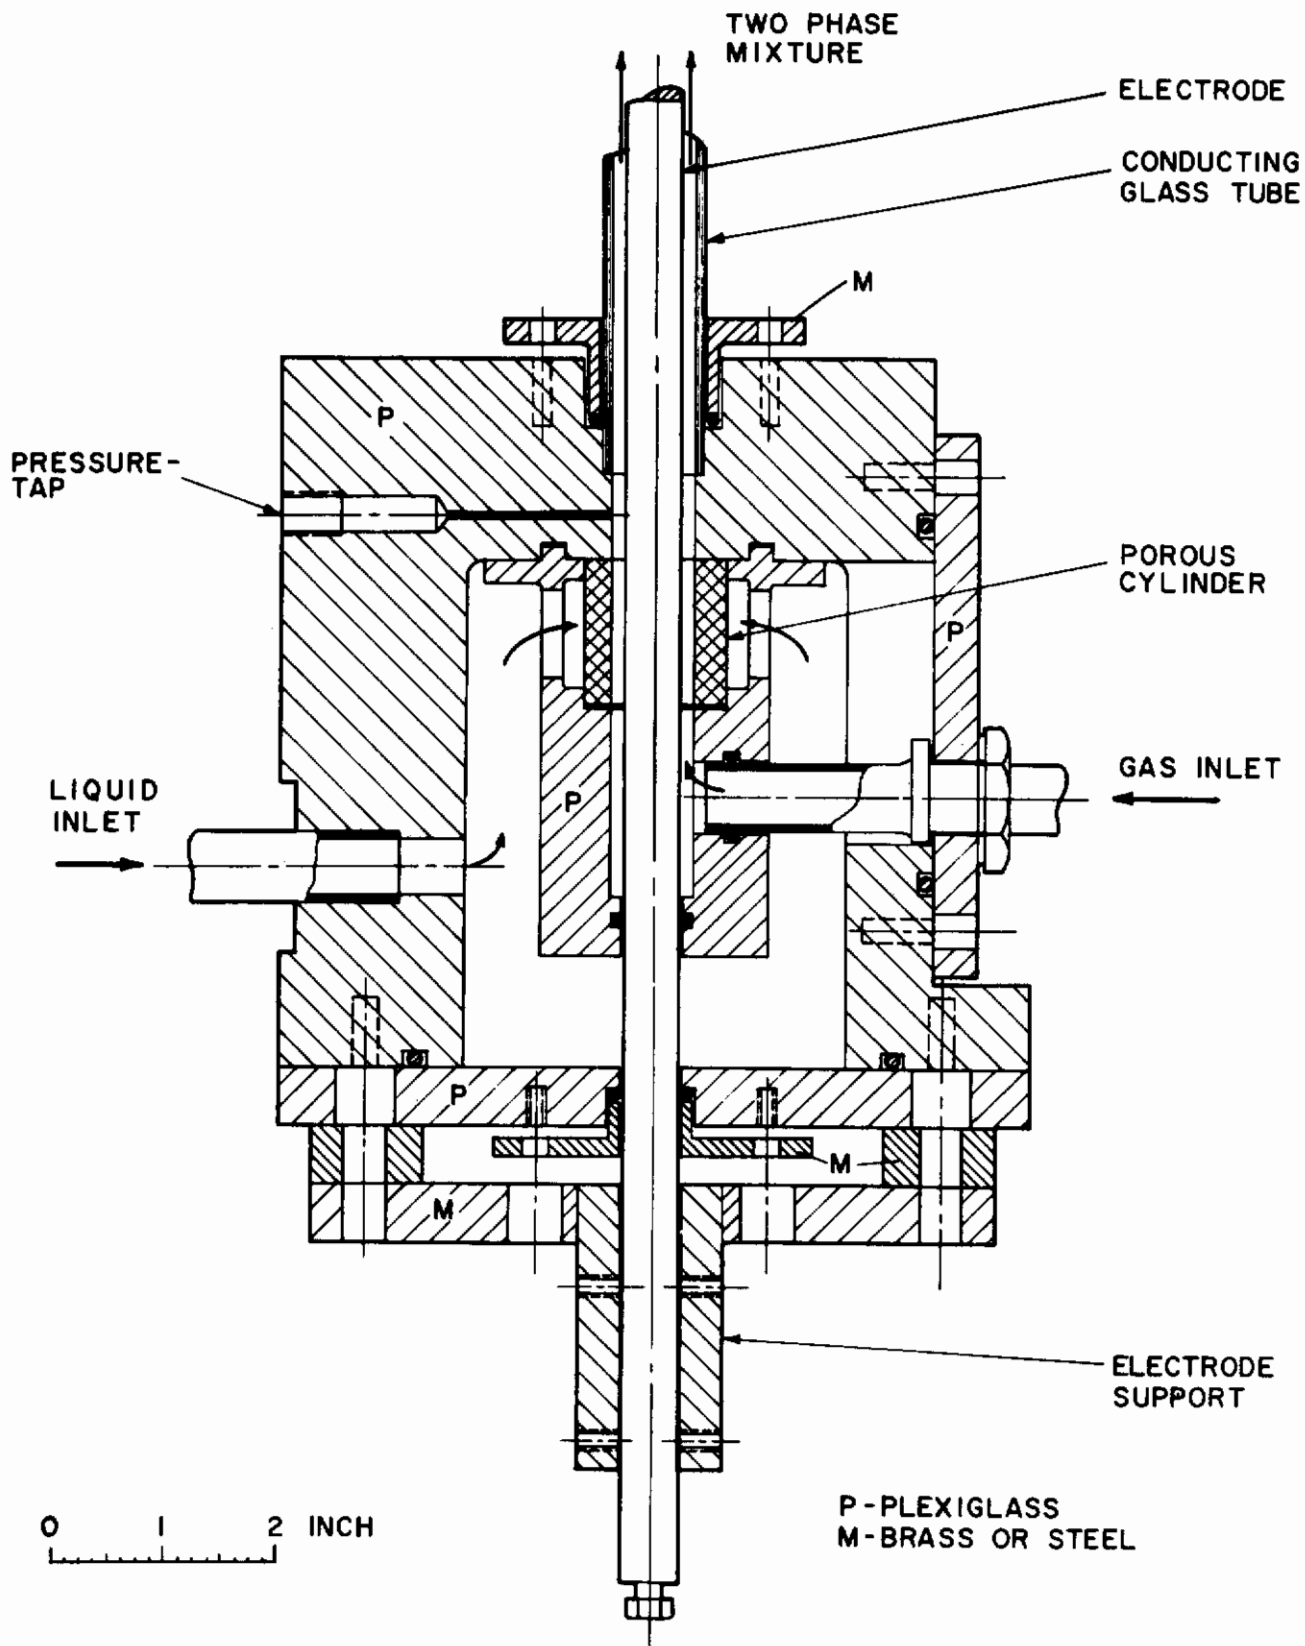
INLET SECTION AND BOTTOM ELECTRODE SUPPORT
